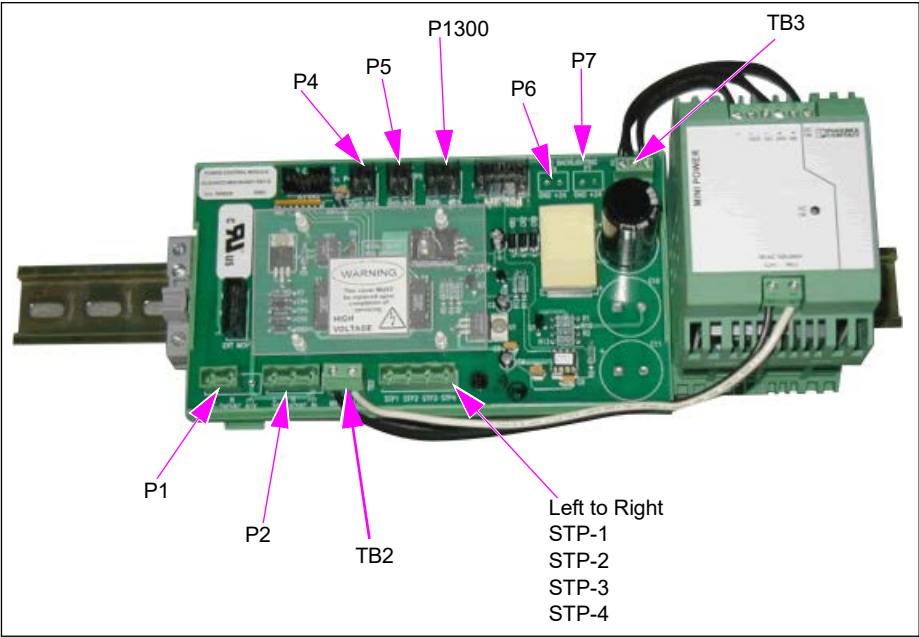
M04104A001 Power Supply Assembly Components - 2
